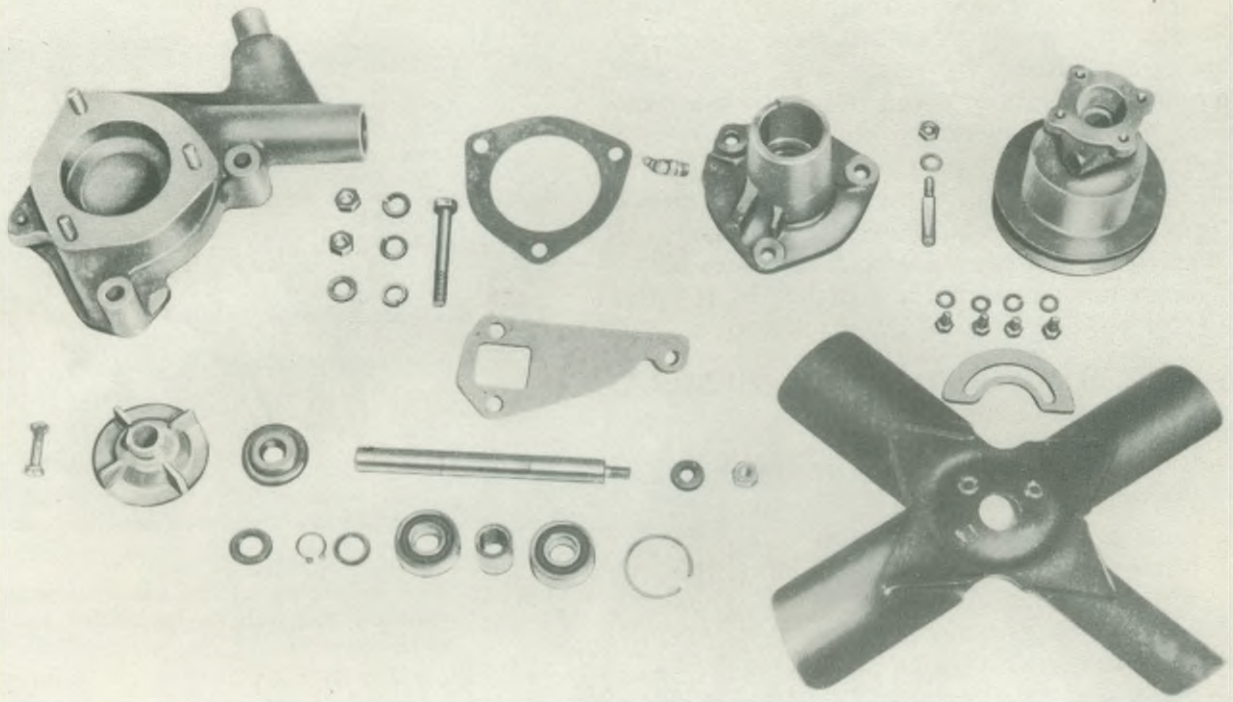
Exploded view of water pump items—assembly Detail No. 500113 (used on Engine Nos.V46611E and future)
